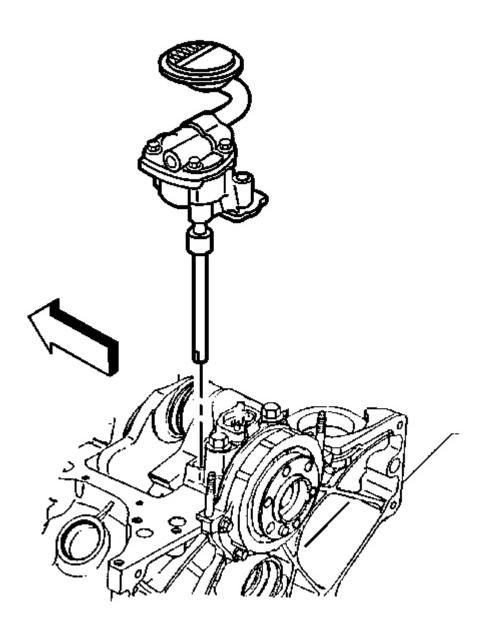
View Of Oil Pump Courtesy of GENERAL MOTORS CORP.
